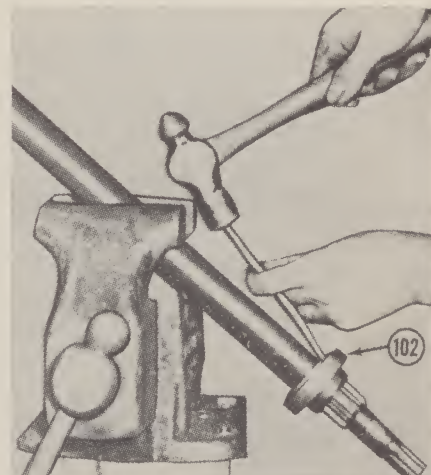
Removing bearing (102) and oil seal sleeve (91) from pto drive shaft used with "live" type pto.
